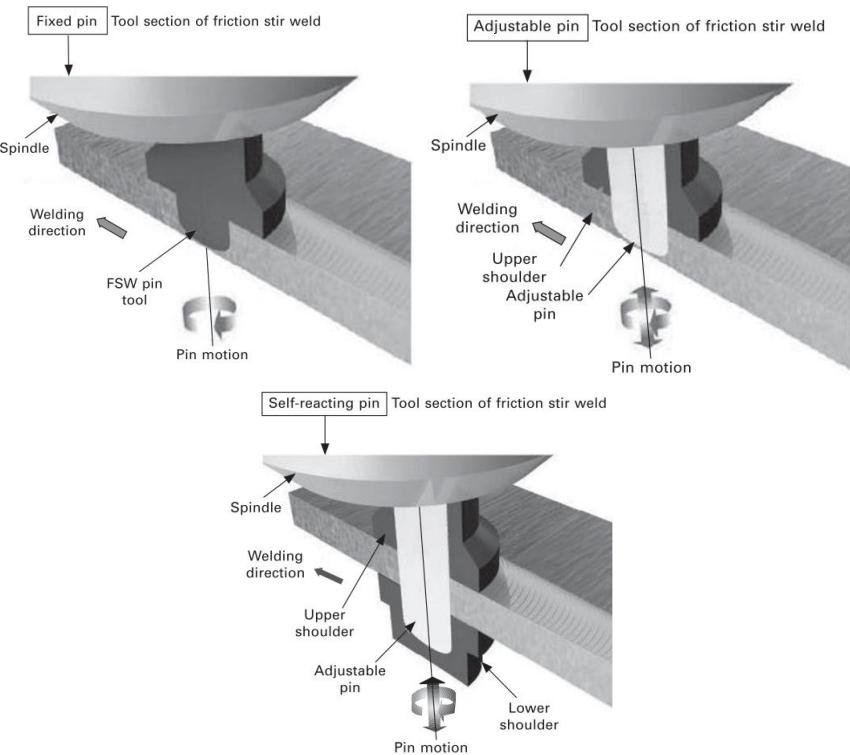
FSW types of welding - fixed-pin (left), adjustable-pin (right) and self-reacting pin (bottom)[2-3]
